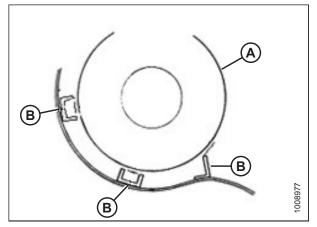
End View Diagram Showing Auger and Stripper Bars
